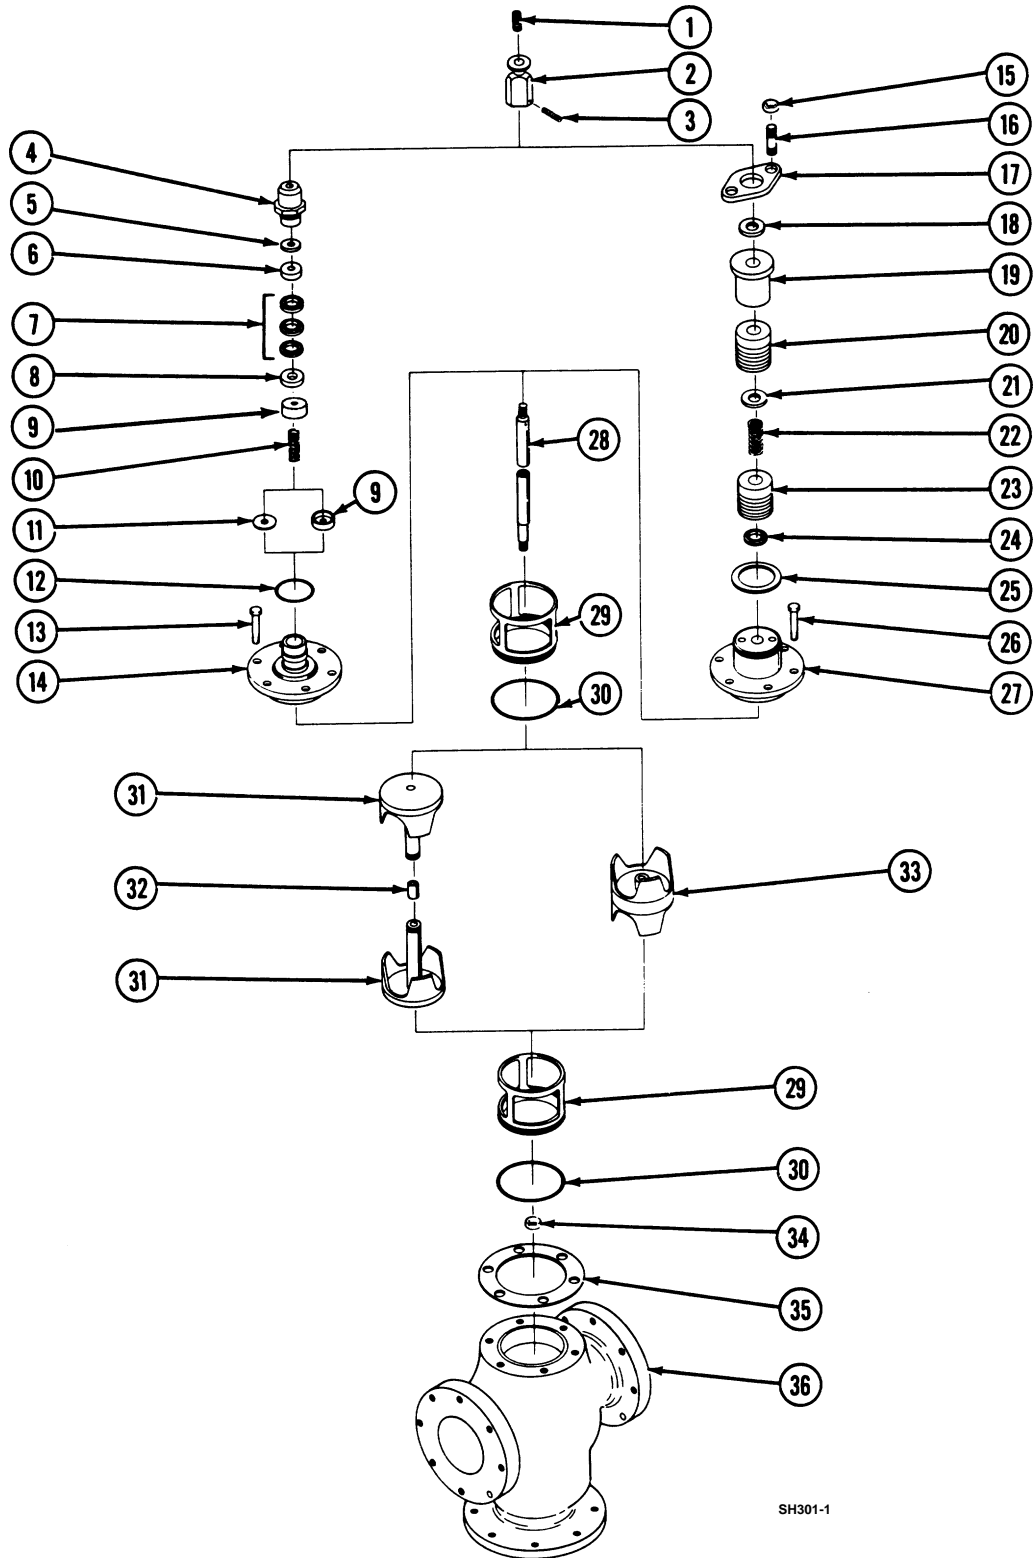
V5013B-E Three-Way Flanged Body Valves—Exploded View.
